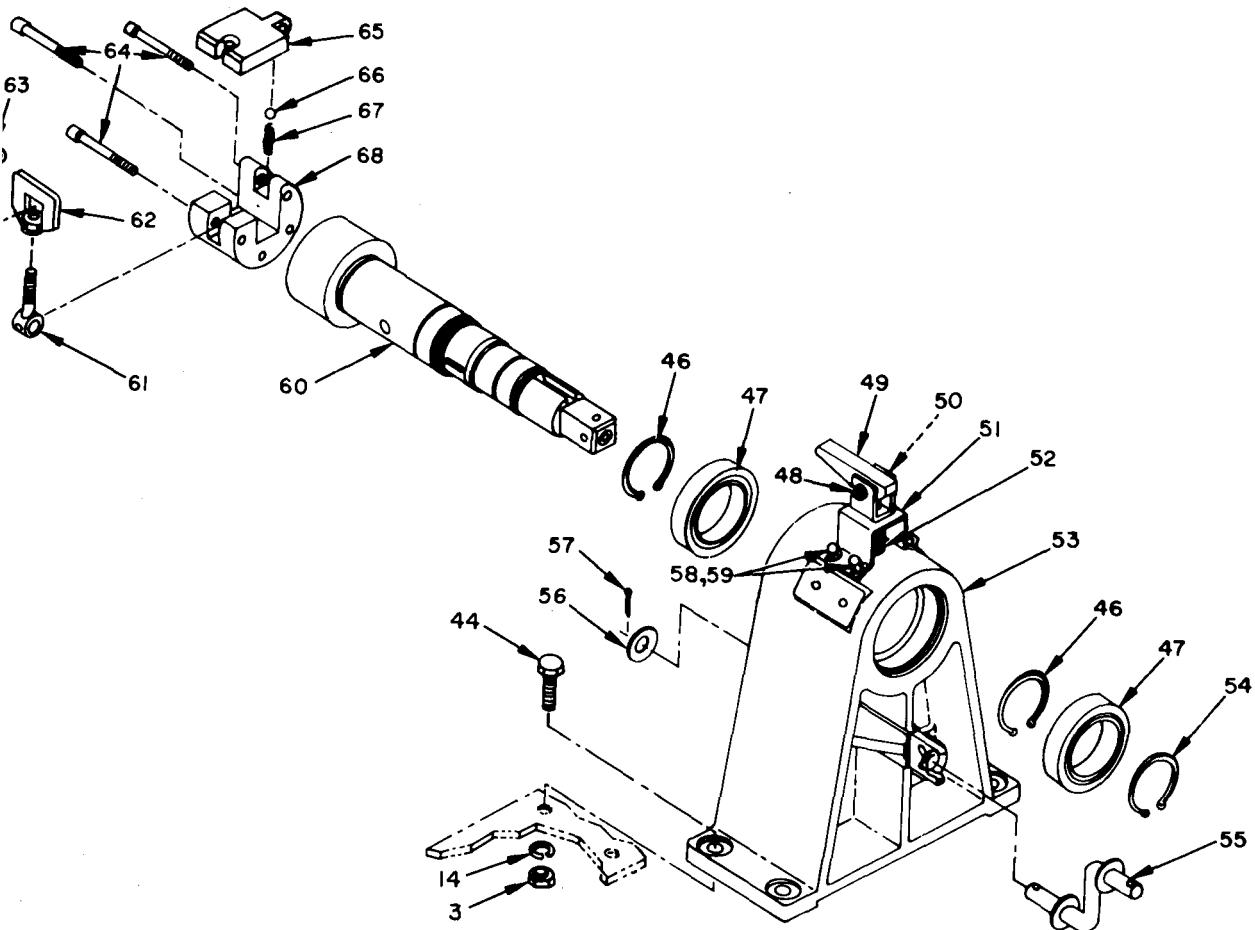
Clutch and Brake Assembly 1A2 (Sheet 2 of 2),
